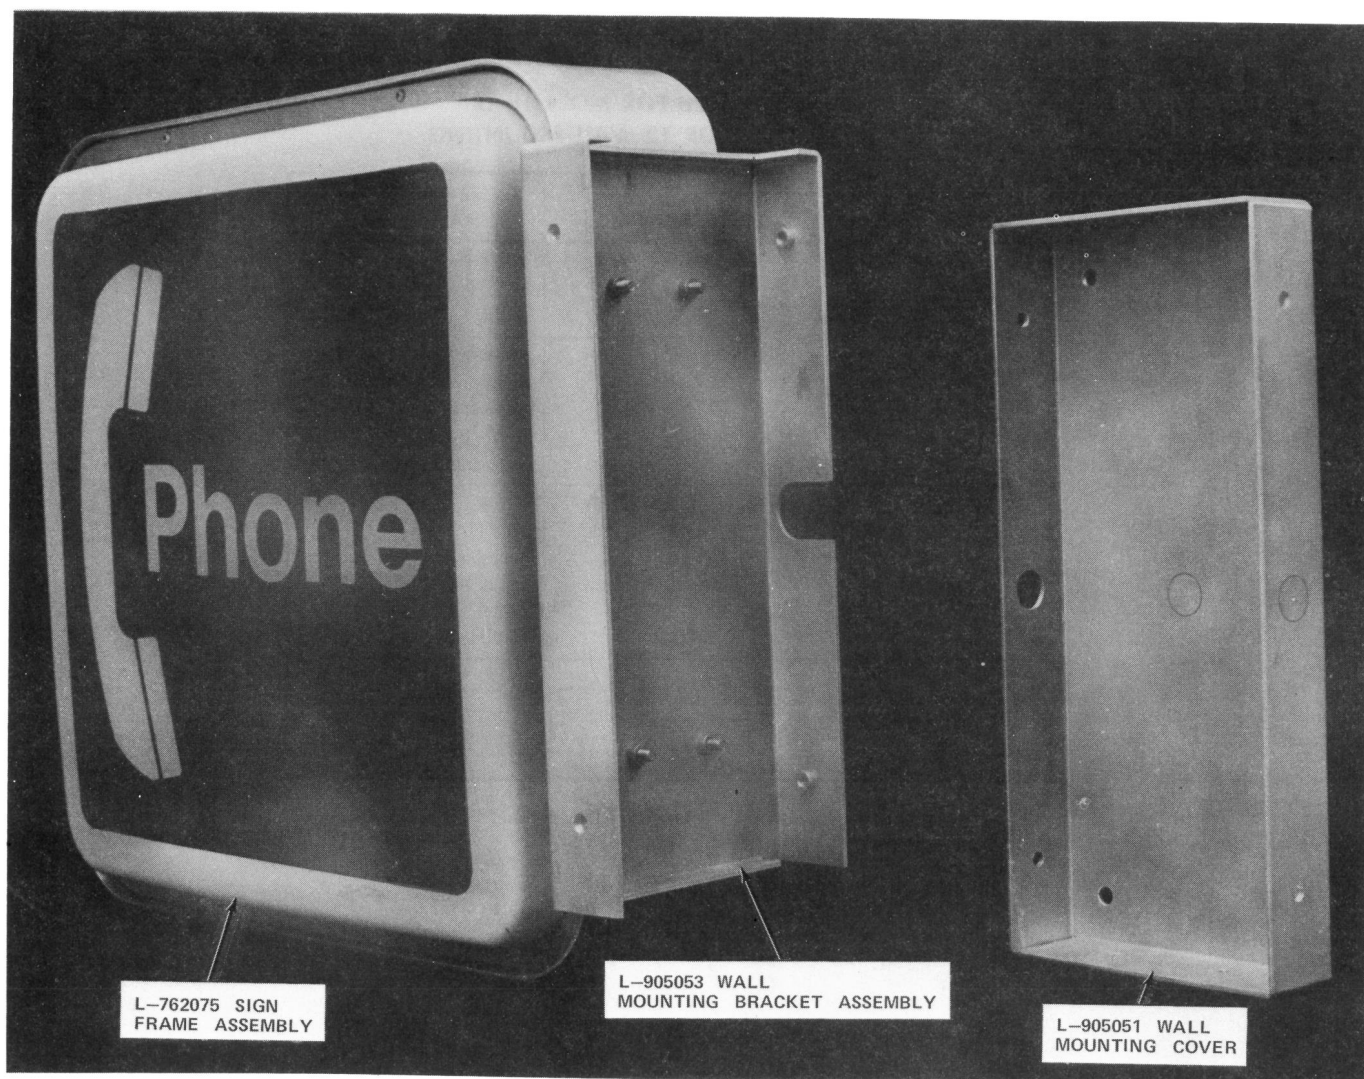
♦KS-20135, List 2 Sign and List 15 Wall Mounting Bracket♦
